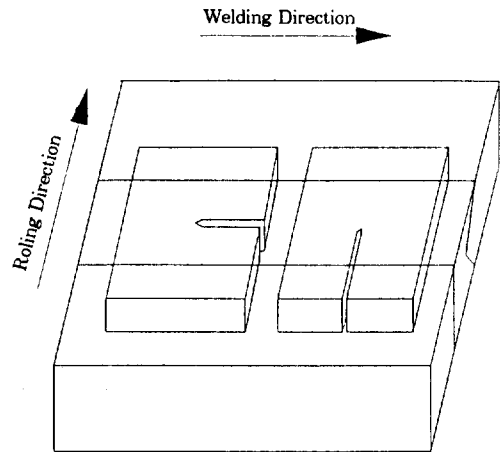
Modified WOL Specimen taken from Weld Metal, HAZ and Base Metal
